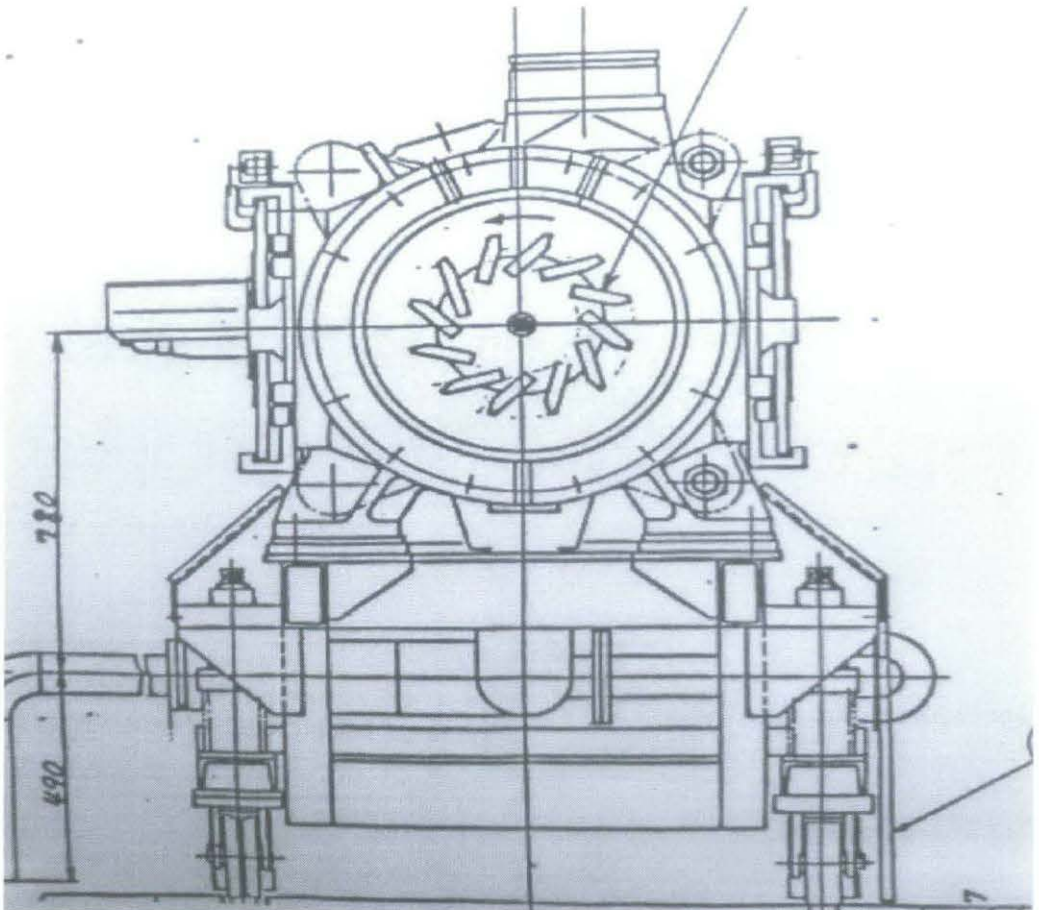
Cutter blades rotor on pelletizer drive attached to the drive carriage<sup>2</sup>.
